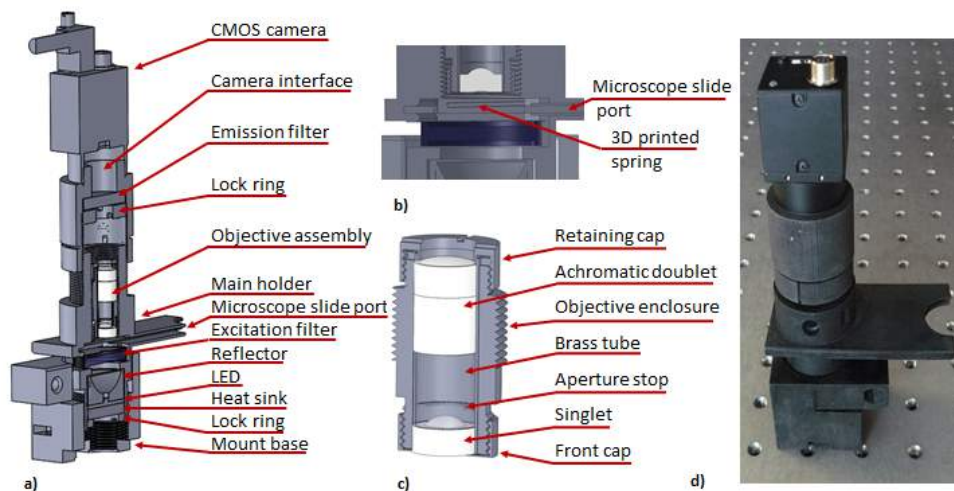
(a) Optomechanical schematic of the miniature WBC microscope, (b) cross-section through sample chamber with 3D printed microscope slide positioning springs, (c) details of the optomechanical assembly of the prototype of the WBC objective, (d) photograph of assembled 3D printed WBC microscope is shown on an optical bench. The spacing between the holes is 1 inch for reference.
